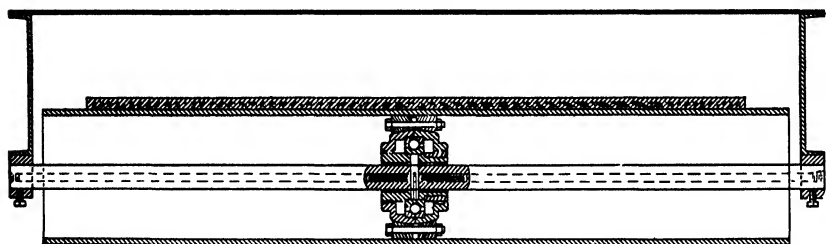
Flat Roll Training Idler. (Robins Conveying Belt Company.)
